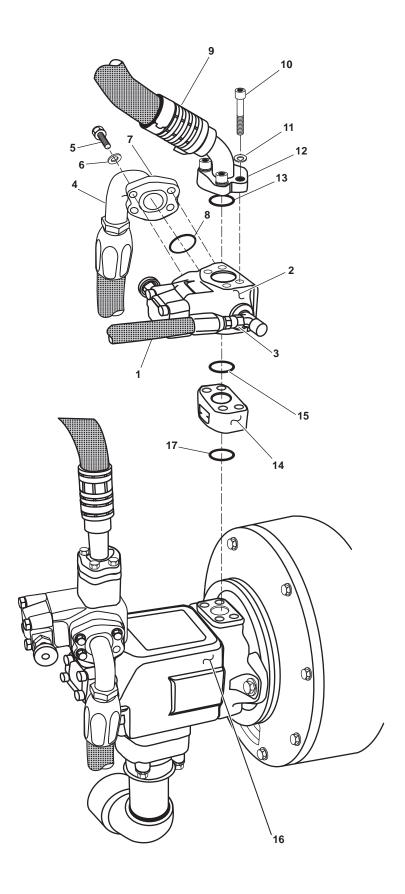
Hydraulic Pump and 3-Port Compensator Valve
